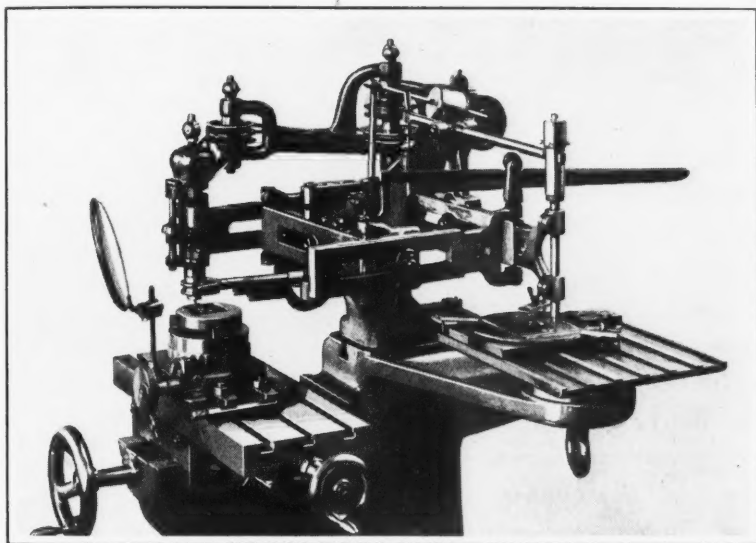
Pantograph Engraving Machine Equipped with Cutter-spindle having Vertical as well as Horizontal Movements Controlled by a Tracer in Contact with the Model
